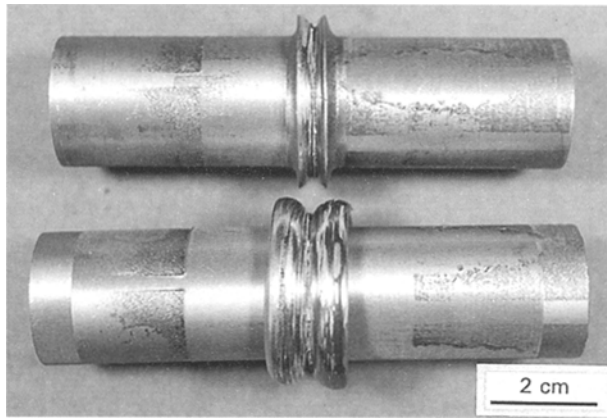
Inertia-friction welds produced using low axial force (top) and high axial force (bottom).
